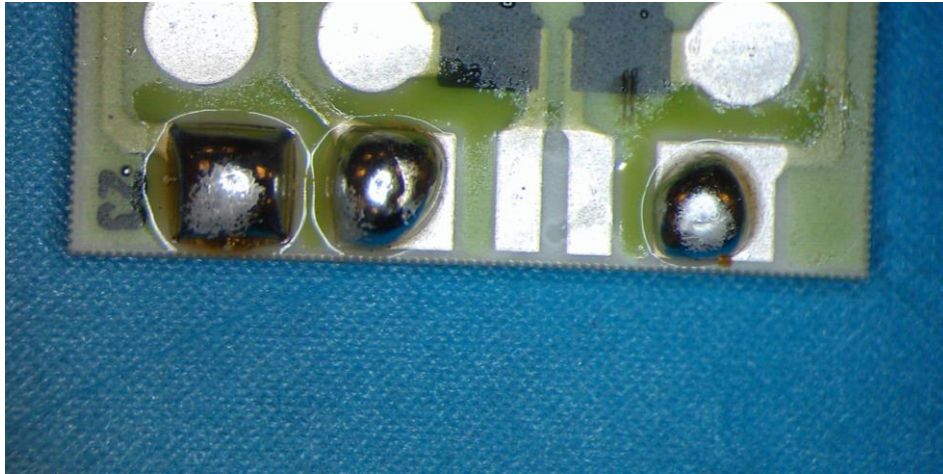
Example of good solder joint (left) and bad solder joints (middle & right).
